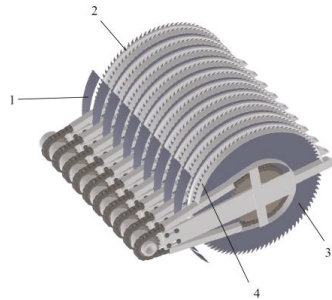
Sawtooth roll-tie-type cotton-picking mechanism: 1. straw shield; 2. ground wheel; 3. serrated disc; 4. guard ring.
